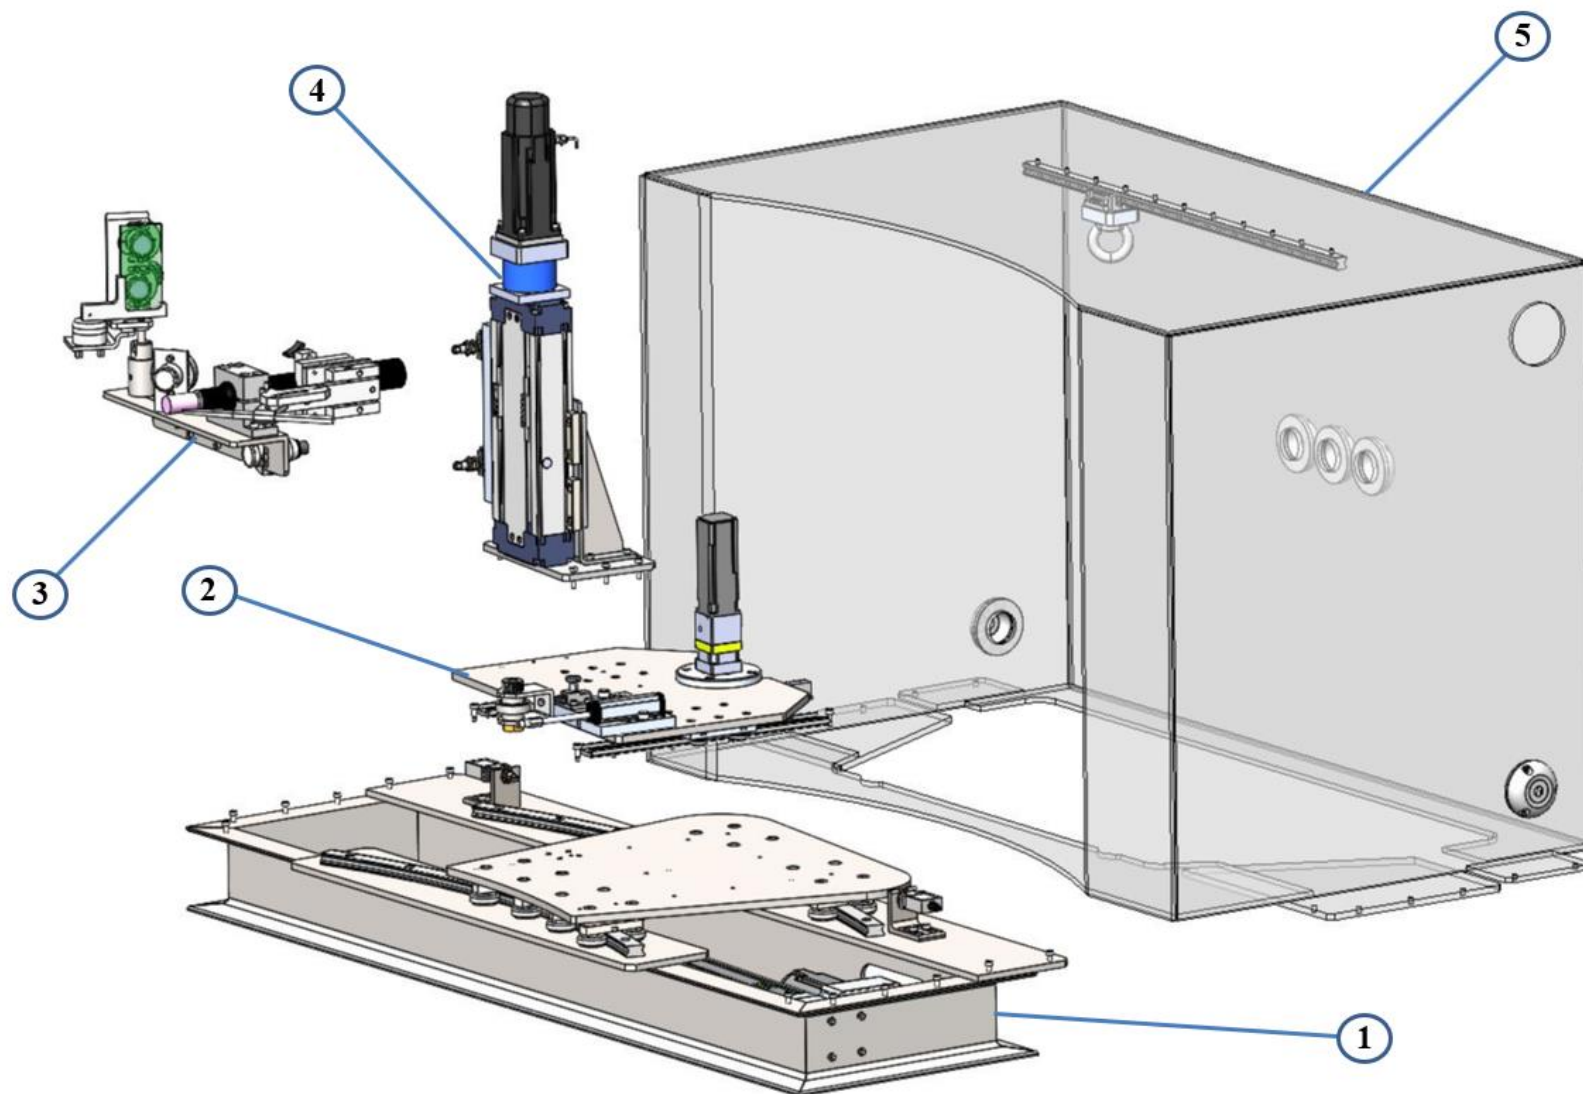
VRM exploded view: (1) support base, (2) radial carriage and actuator, (3) welding head, (4) welding head base and axial actuator, and (5) fume extraction box.
